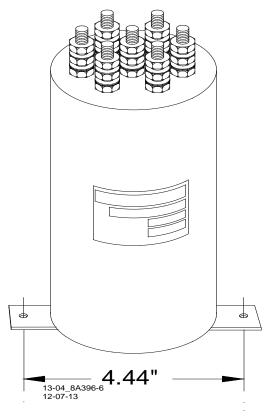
Adjustable Inductor Assembly, 8A398-6
